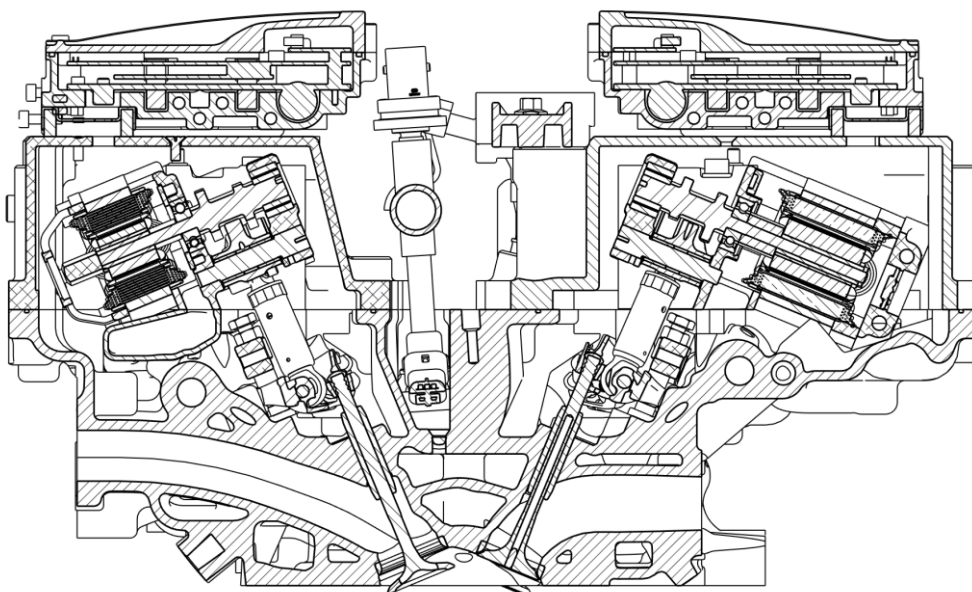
16 valve, 4 cylinder in-line iVT package - cross section through the cylinder
